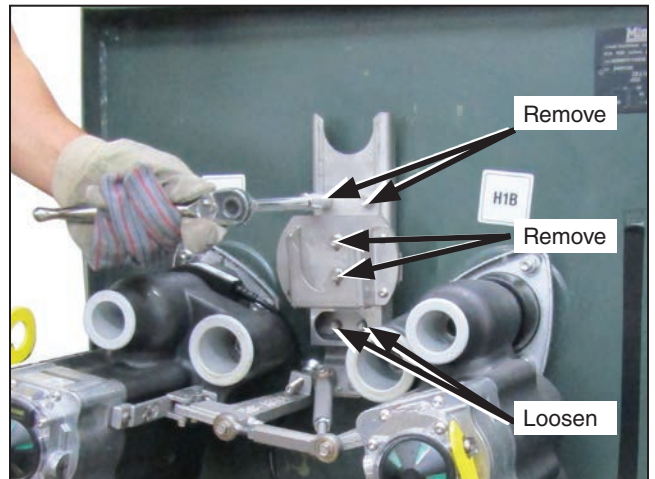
Remove the two screws on extender. Loosen the screws on the parking stand spacer and parking stand extender.
